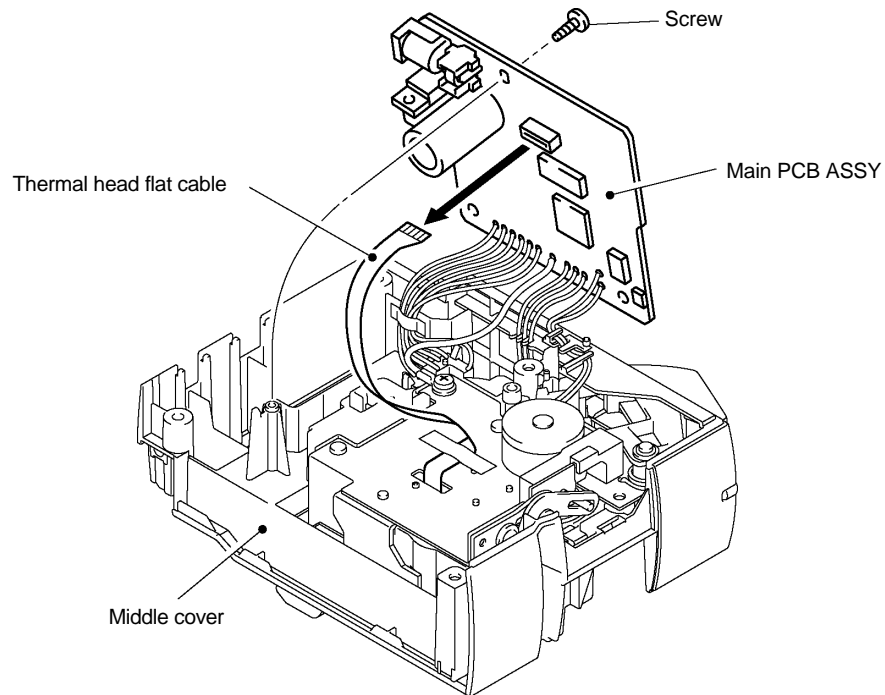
Removing the Main PCB ASSY (1)
